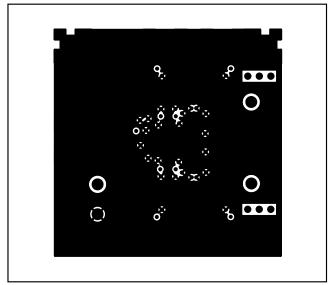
MAX2023 EV Kit PCB Layout—Inner Layer 2 (GND)
